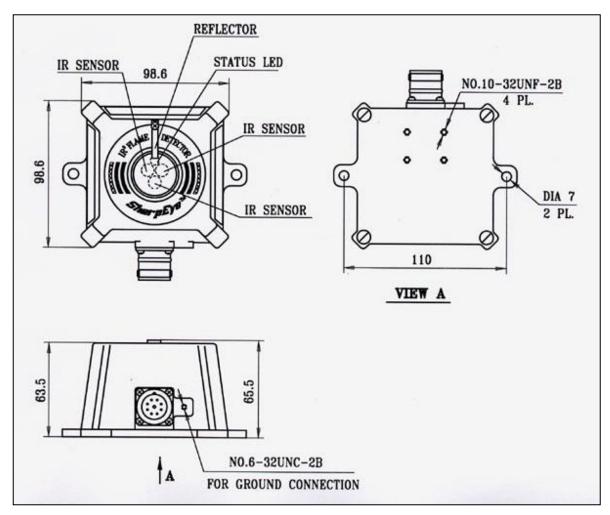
Flame Detector Assembly - Outline Drawing (Connector Output Option)
